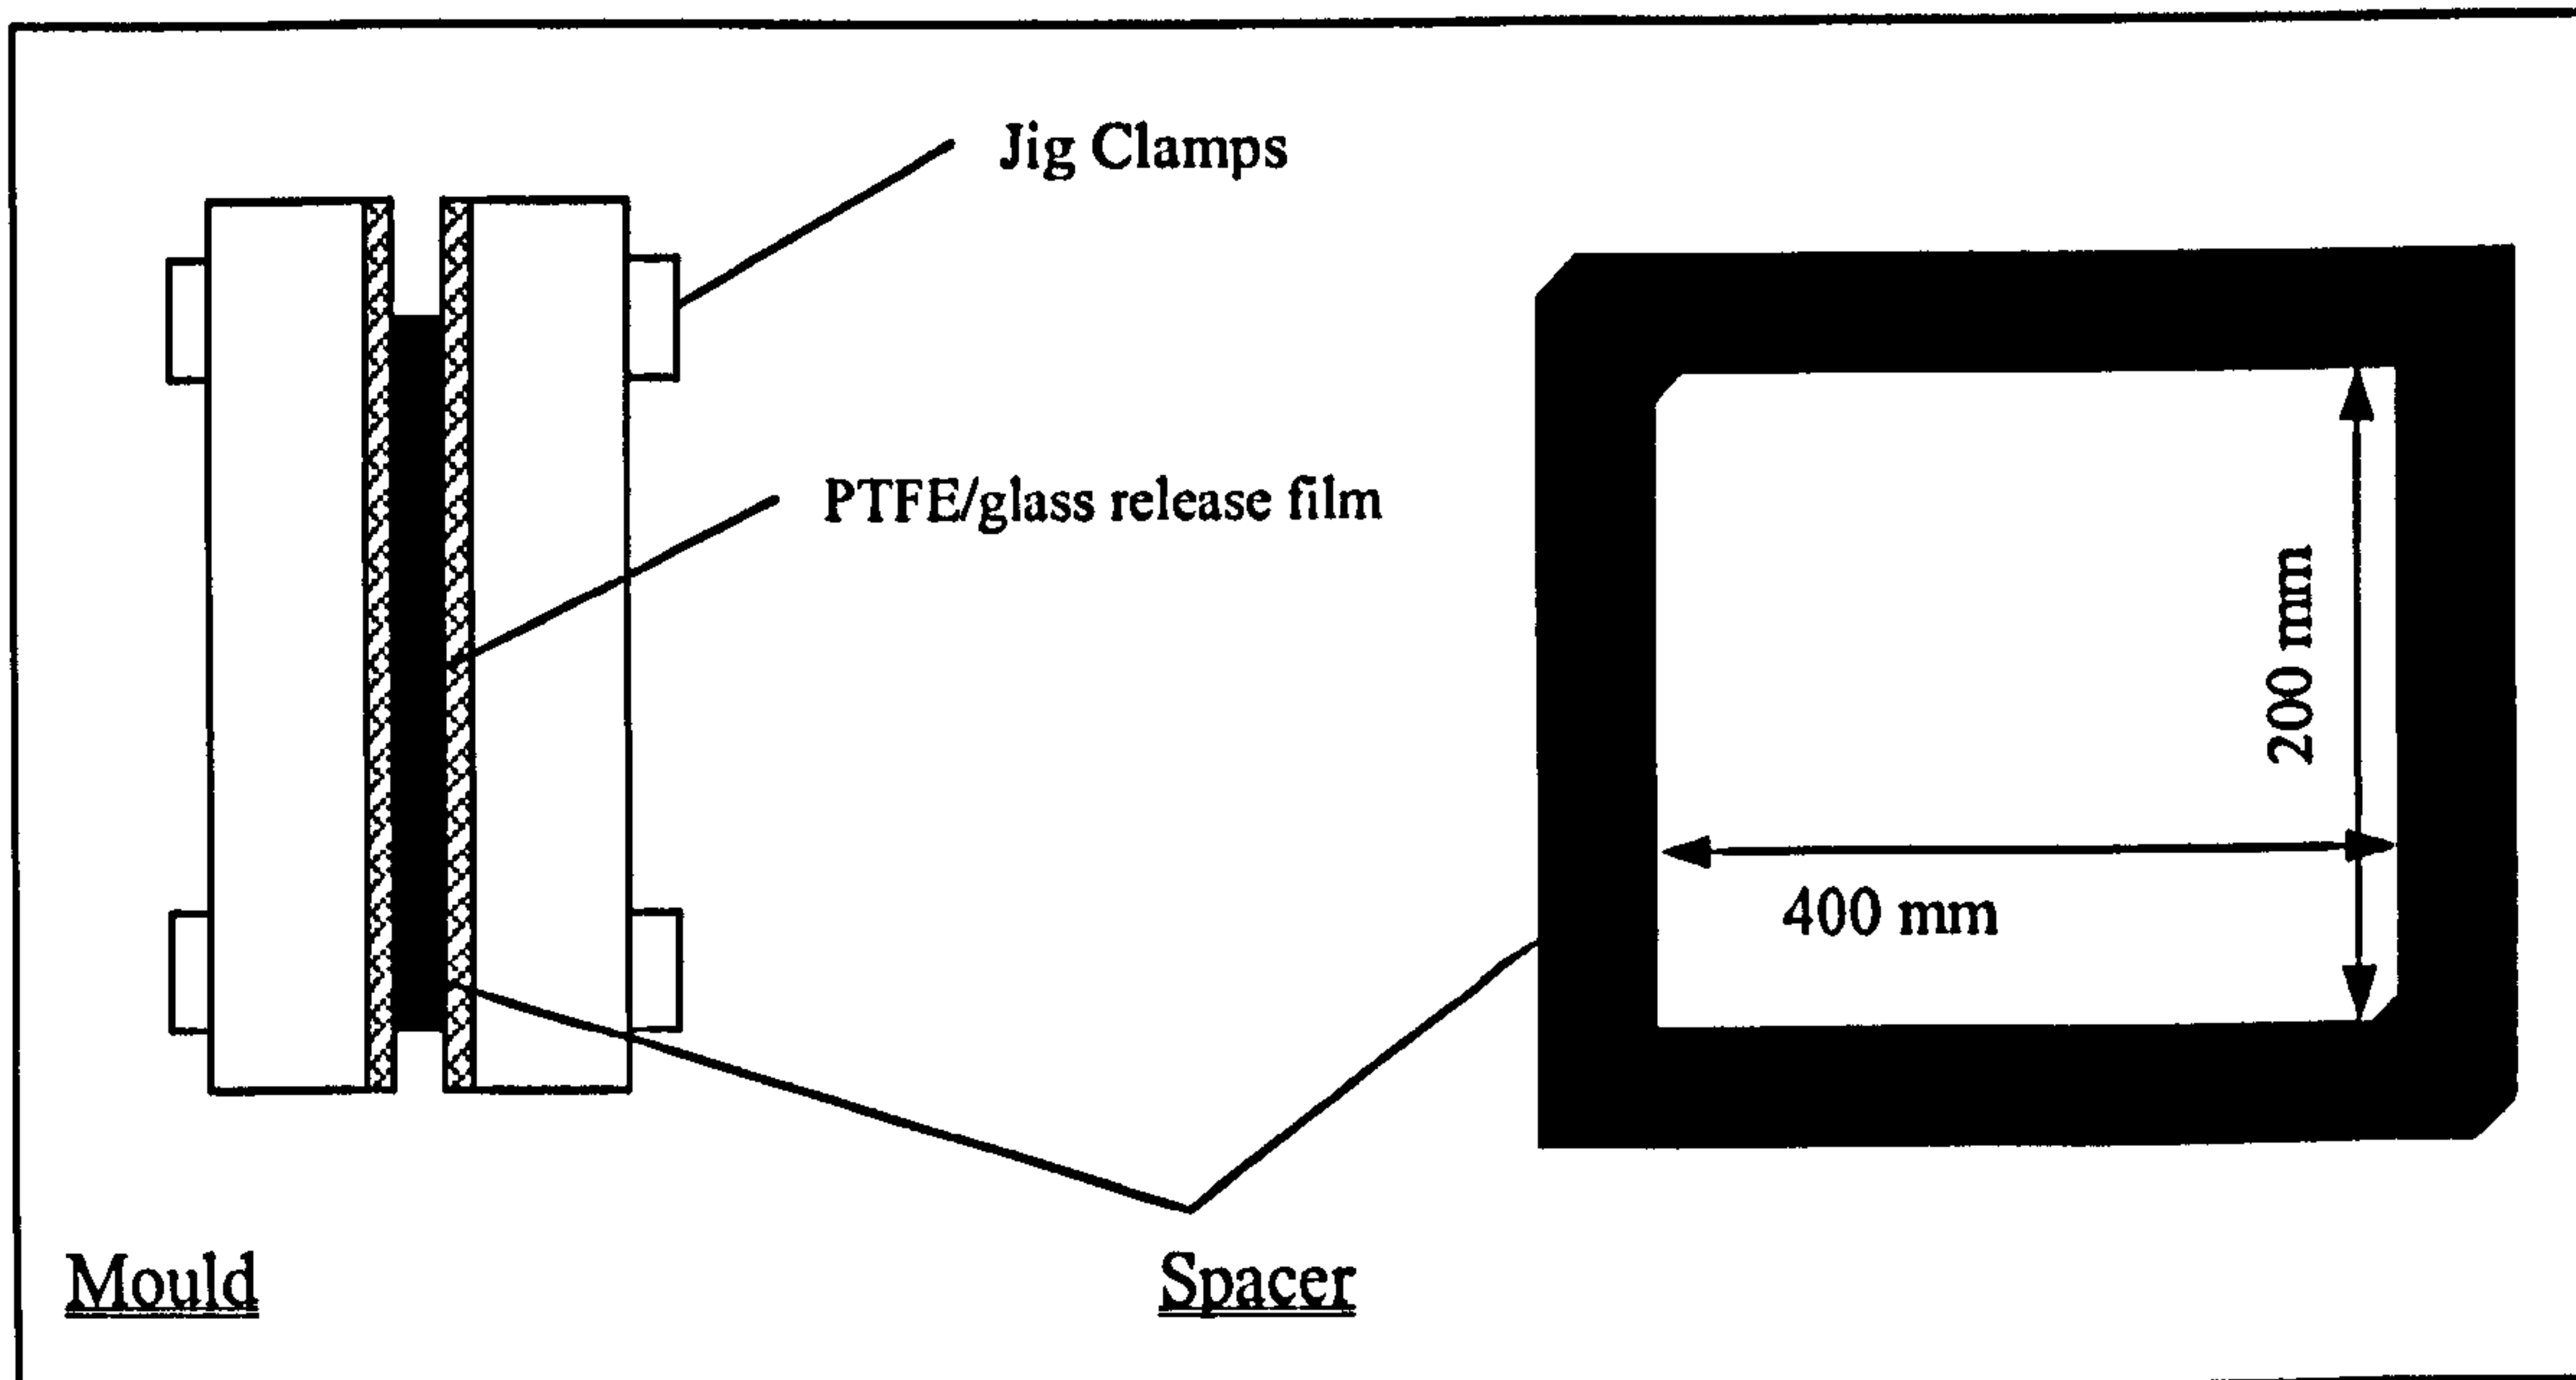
Mould assembly for mechanical test samples (dimensions given for single resin plate)
